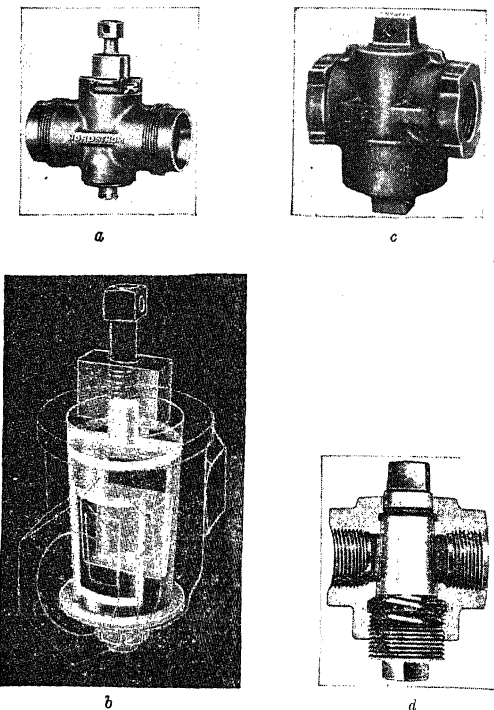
Gas-service plug cocks, lubricated type: (a) external view of curb cock with ends for compression couplings; (b) transparent view of screwed-end curb cock with lubricating ducts emphasized; (c) external view of screwed-end meter cock; (d) sectional view of screwed-end meter cock.
